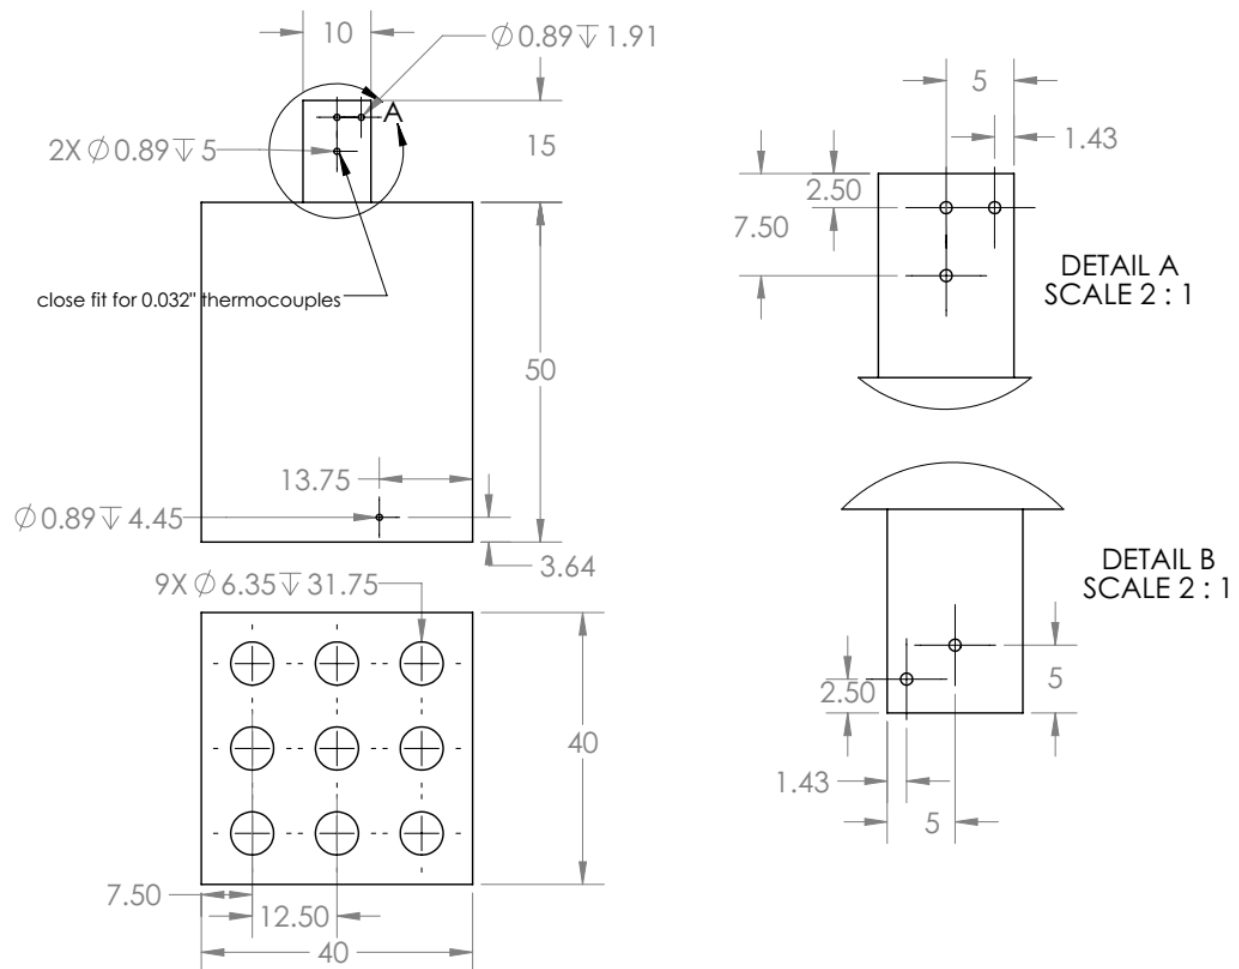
Technical drawing of the copper heater block. All dimensions are in millimeters.
